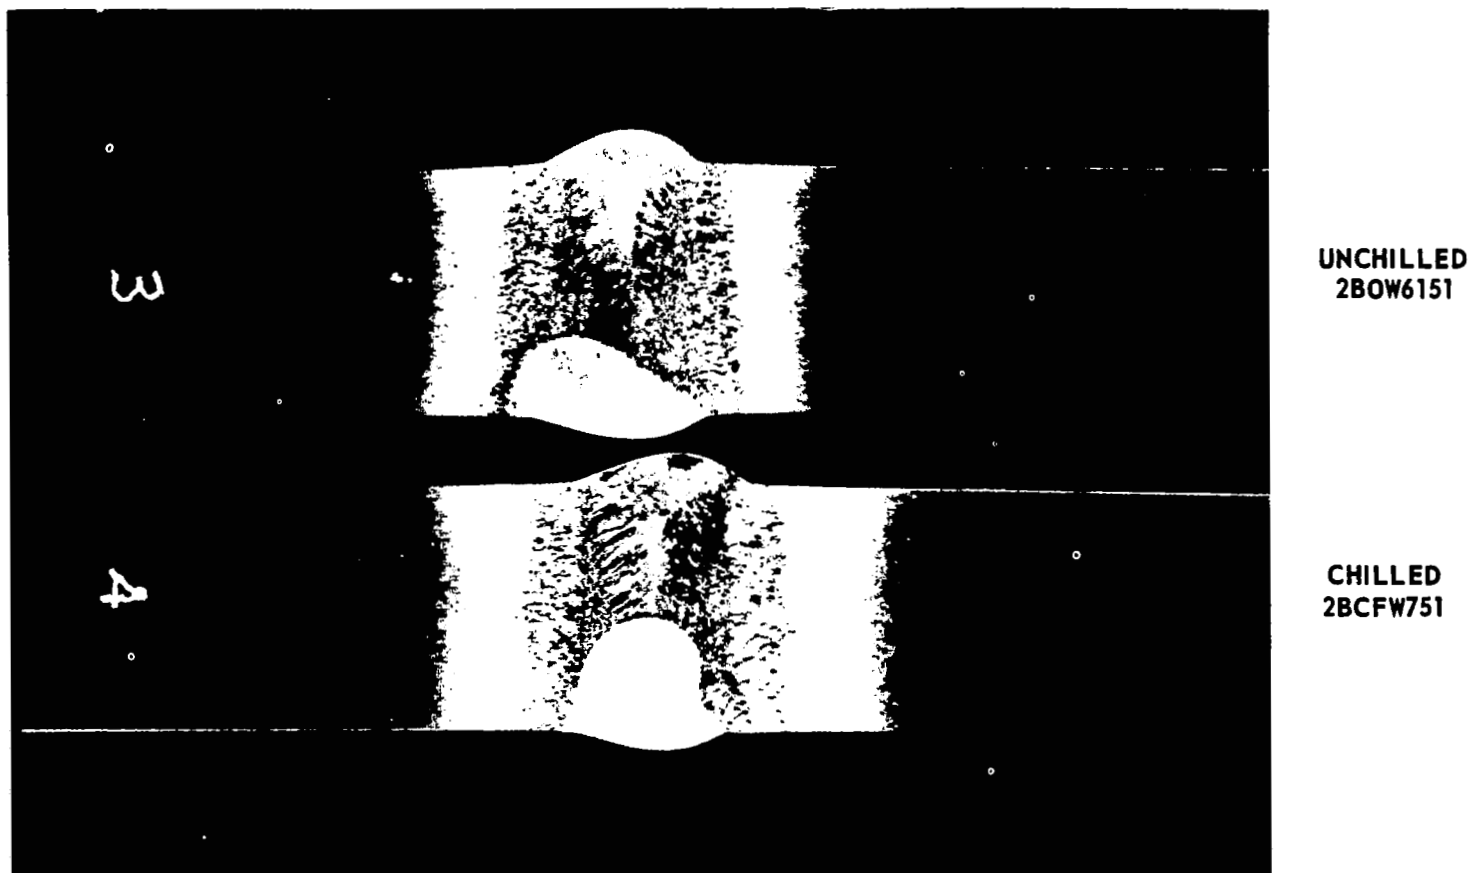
Macrosections showing effect of front-side chilling of welds.
